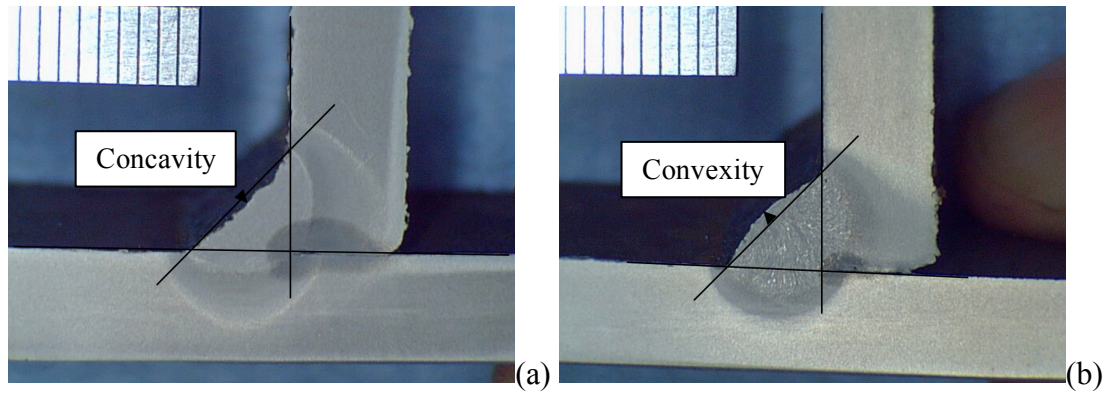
Weld macro for (a) argon / 20% carbon dioxide showing the concavity of a typical weld, and (b) alternating shielding gases showing the convexity of a typical weld
